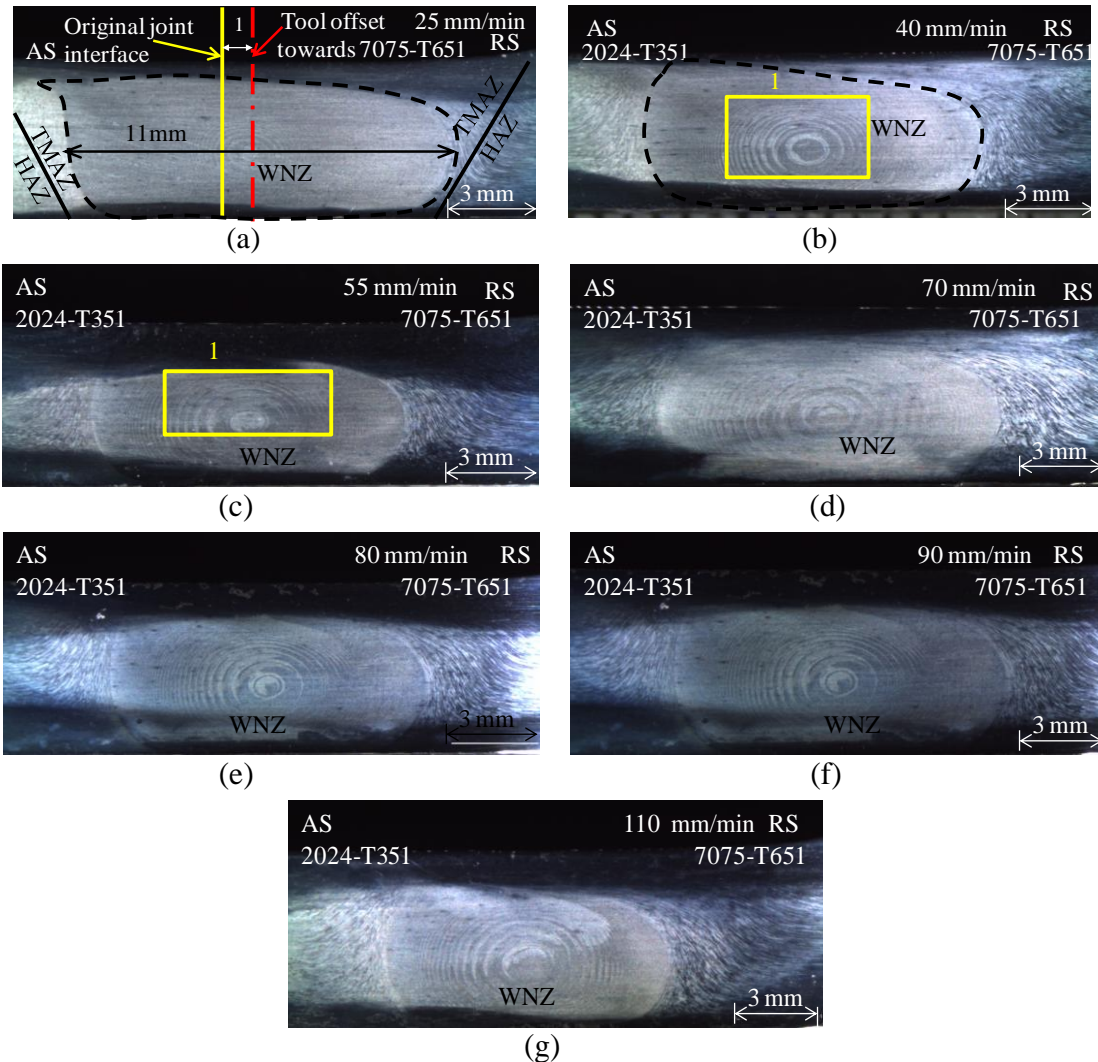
(a)-(g) Macrographs of weld section of FSW dissimilar aluminium alloys joint for tool probe offset of 1 mm towards AA7075-T651 and VTS range 20-120 mm/min.
